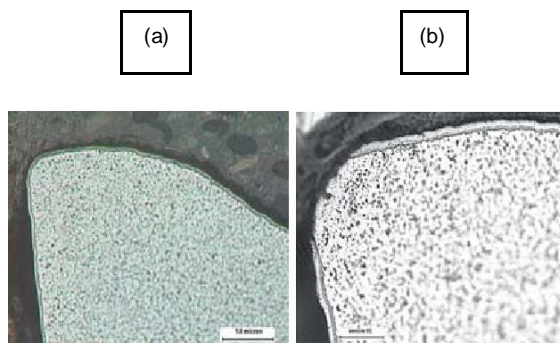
The location of the damaged zone in the cutting tool. (a) New sectioned cutting edge, and (b) worn cutting edge just after total cutting length of 250mm (115m/min, 0.165mm/tooth, 2.25, 8.8mm) [11]
